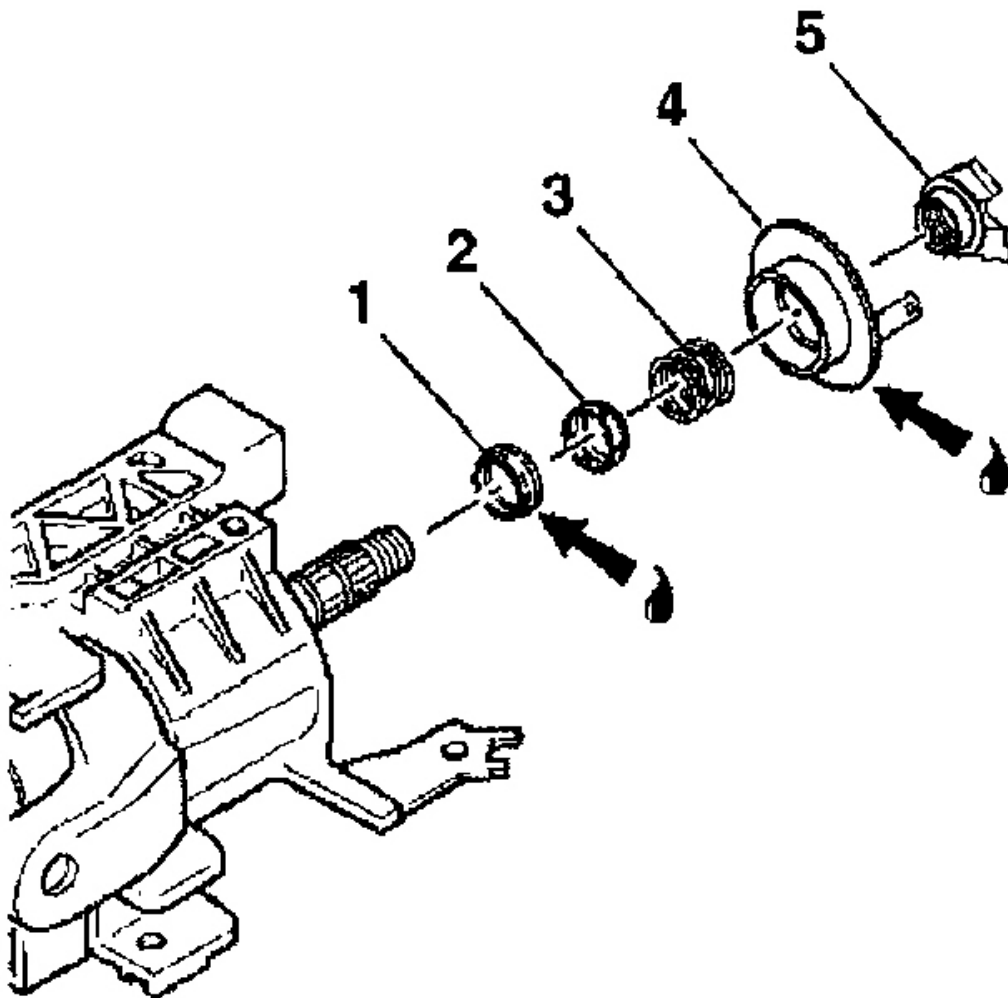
Installing Steering Shaft Assembly Wave Washer
